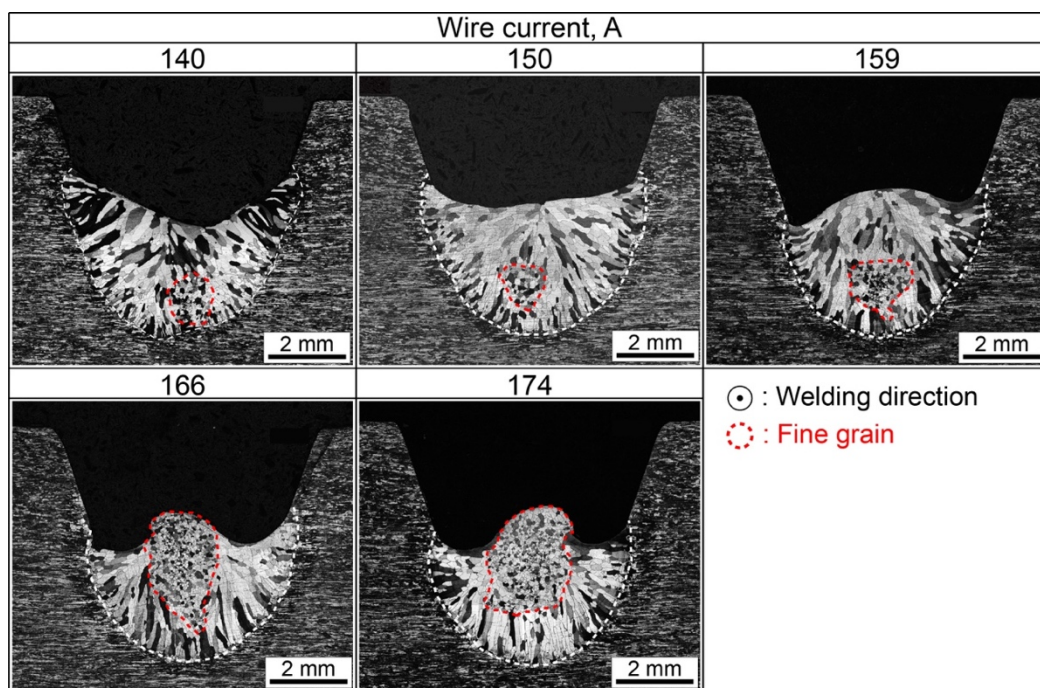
Cross-section of weld bead at each wire current on SUS430.
